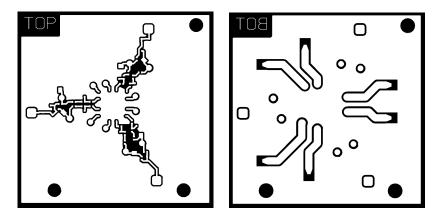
Layout top (left) and bottom (right) layers measurement PCB.
